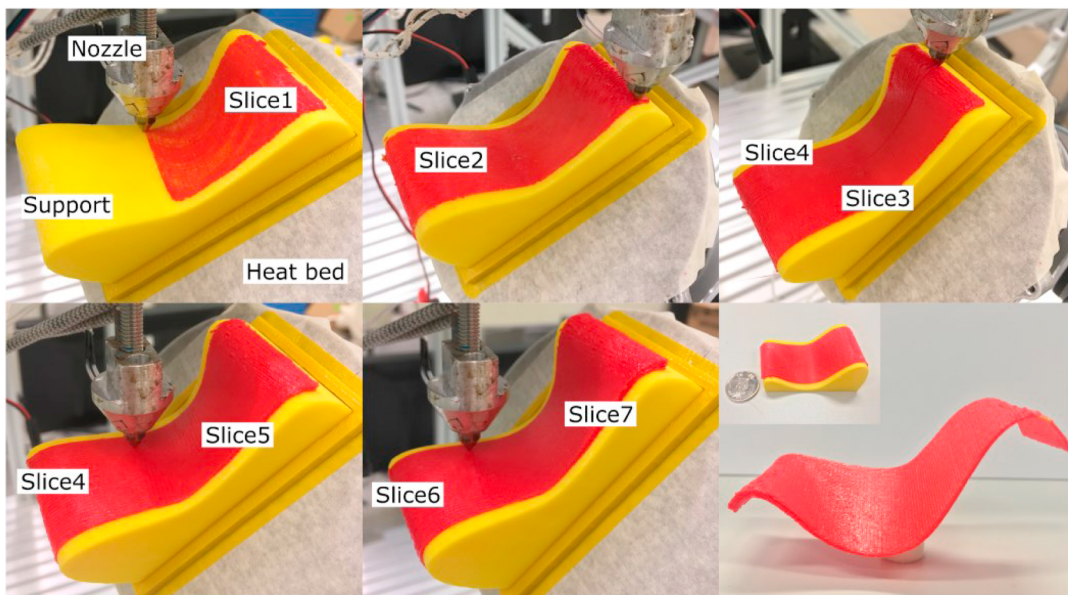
Demonstration of printing a thin-shelled model on a five-axis robotic printing setup [16].
